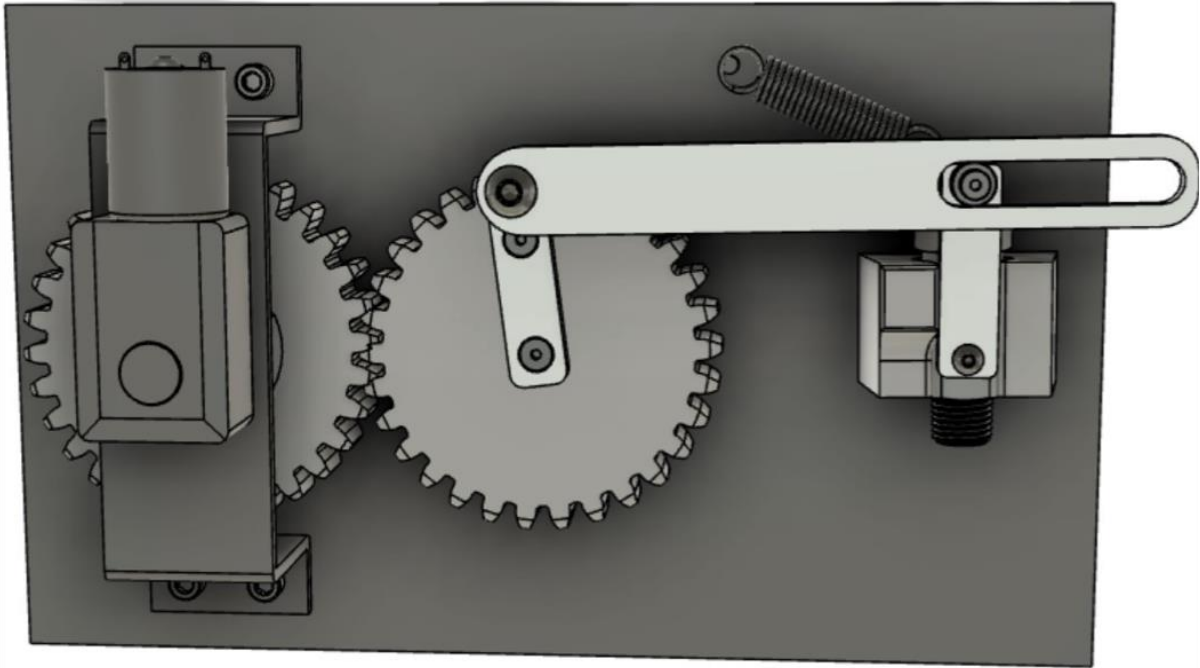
CAD Rendering of the Mechanical Valve Assembly
